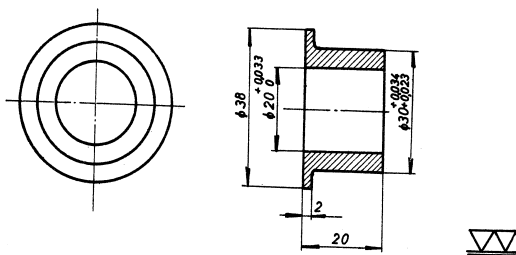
BRONZE BEARING — ELEVATING MECHANISM
